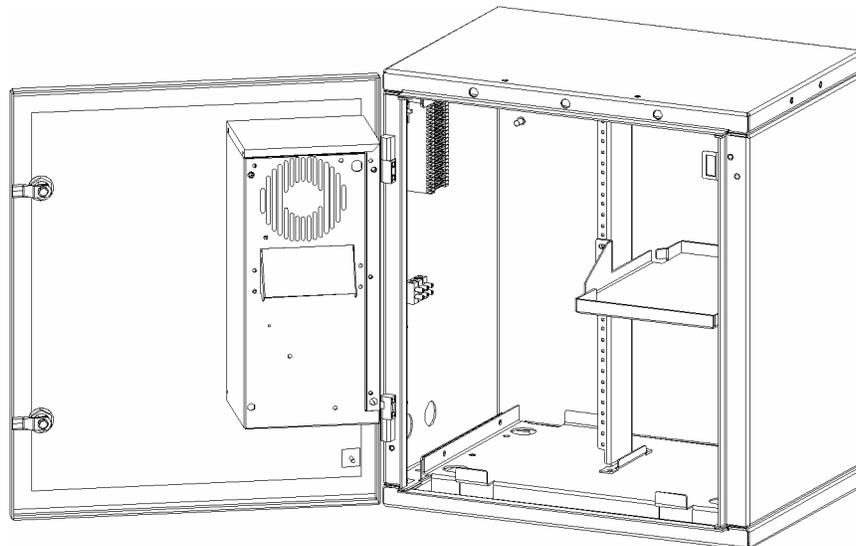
G18 with Recessed Air Conditioner – Internal View
